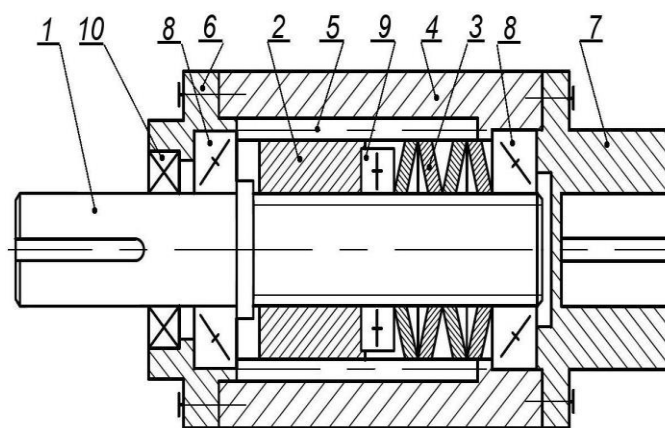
Torsionally flexible metal clutch; designations: 1 – clutch shaft, 2 – sliding sleeve, 3 – set of disc springs, 4 – clutch housing, 5 – moving splined coupling, 6 – cover, 7 – clutch hub, 8 – cone bearings, 9 – thrust bearing, 10 – sealing ring (based on [34]).
